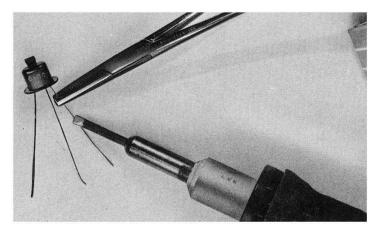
Pliers used as heat sink when soldering transistor leads.
